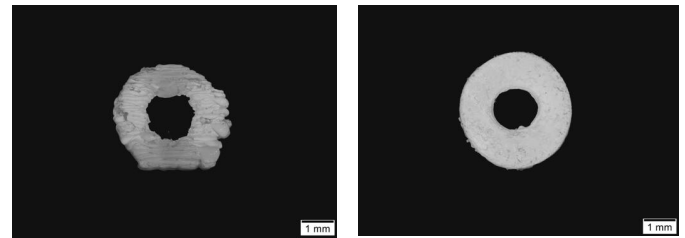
Cross-section of 3D printed vasculature printed using FDM (left) and stereolithography (right)
